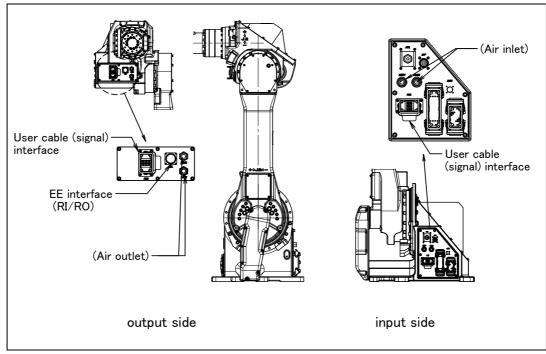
(b) Position of air supply and option cable interface (RI/RO) (When mechanical unit cable A05B-1125-H258 is specified)
